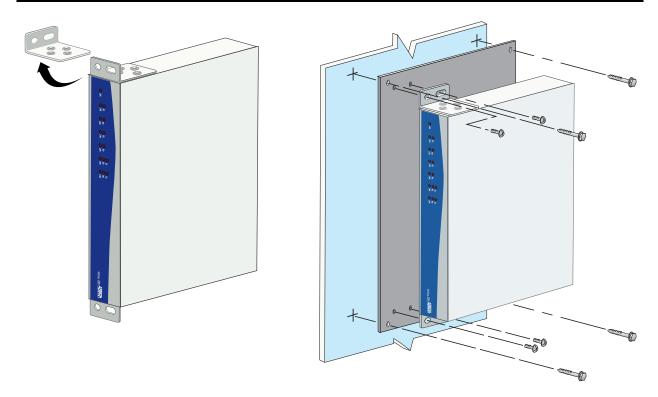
Repositioning the Mounting Bracket for Wall Mounting the NetVanta 3205/NetVanta 3305
